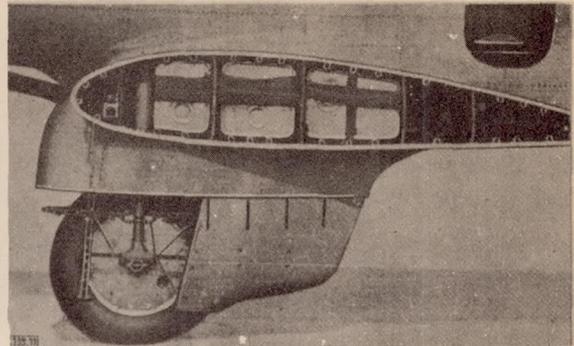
Landing gear and wing stubs of Northrop Delta. Wheel and struts are streamlined. The wing design and the fuel tanks are clearly visible.
